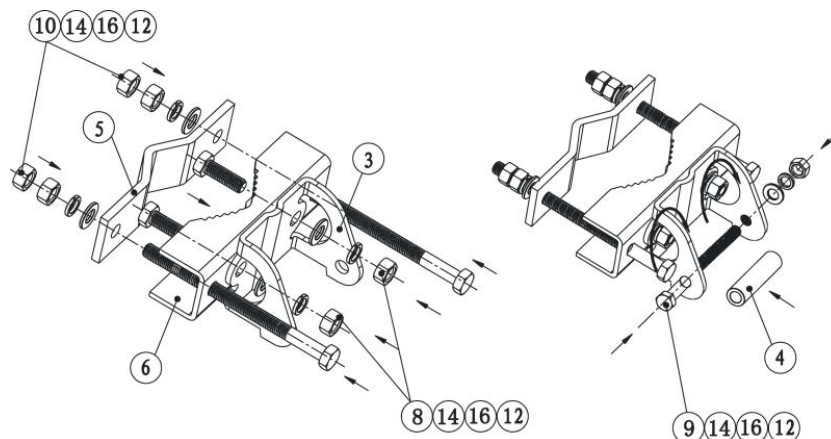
MOUNTING UPPER SUPPORTING ARM
